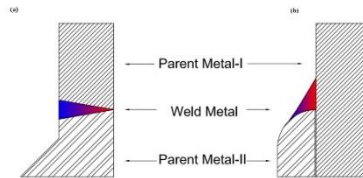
Weld joint design, (a) Butt weld, (b) Fillet weld
